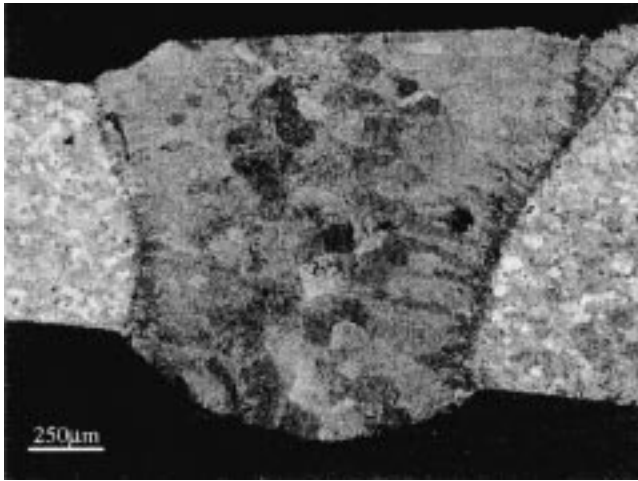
Micrograph of the weld joint in AA5182 in orientation 1 depicting the attachment of the two dissimilar gauges
